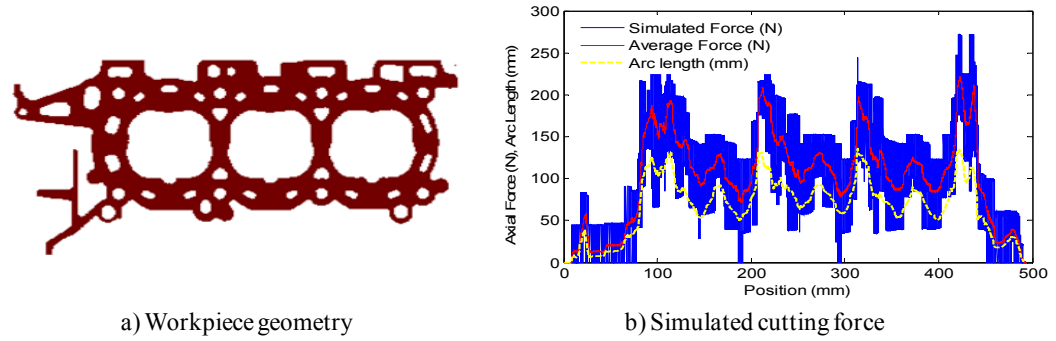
A workpiece with varying geometry a) Workpiece geometry b) Simulated cutting force [50]
